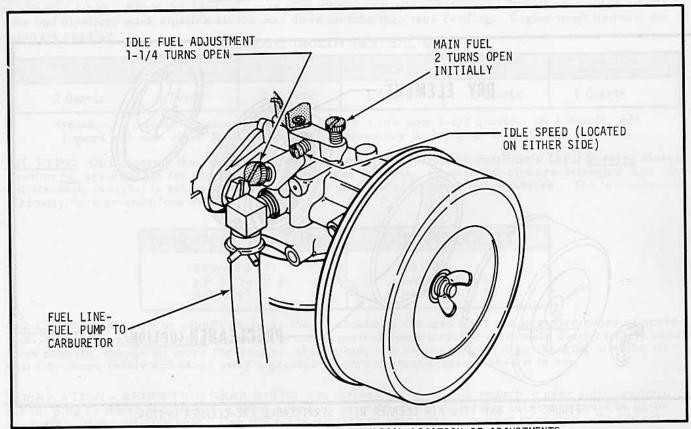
GASOLINE CARBURETOR - TYPICAL LOCATION OF ADJUSTMENTS
